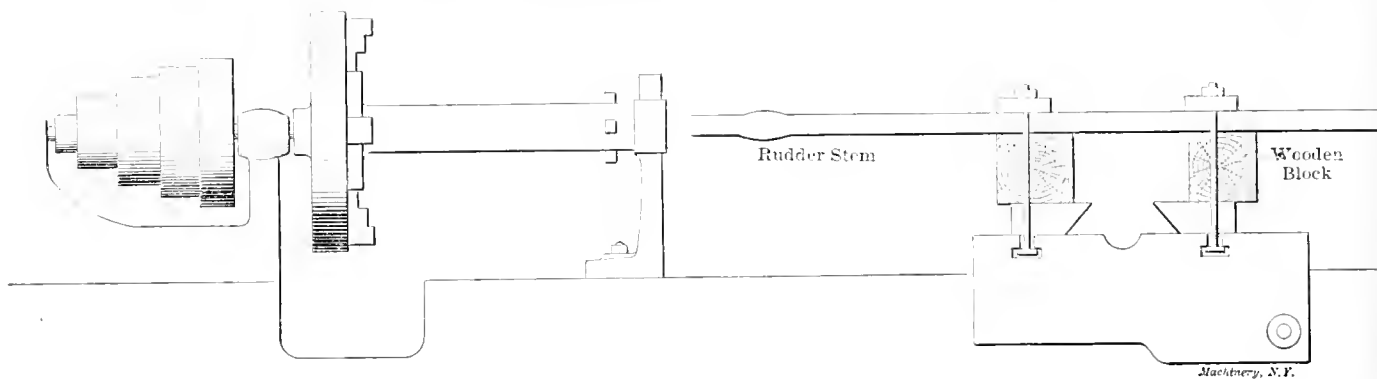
Method of Arranging Lathe and Work, for Machining Rudder Stem.
